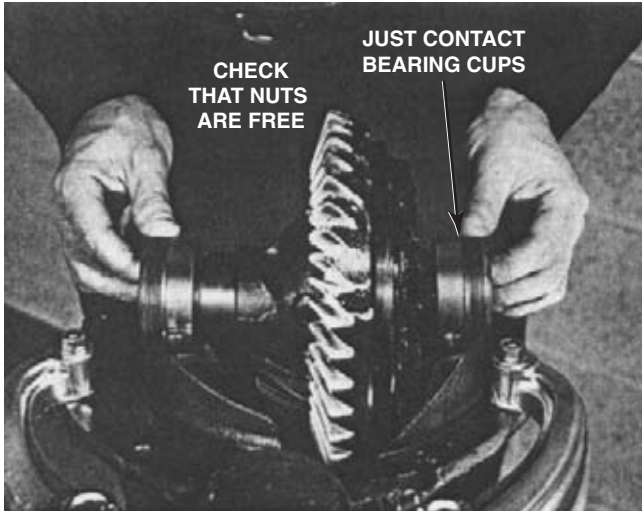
The threaded adjusters are set into place and rotated in their threads to just contact the cups; move the cups into contact with the bearings, and bring the ring gear into contact with the pinion gear. (Courtesy of Ford Motor Company)
